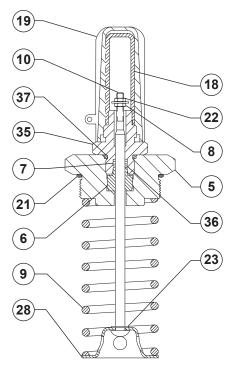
Types 1098-EGR and 1098H-EGR Travel Indicator Assembly
